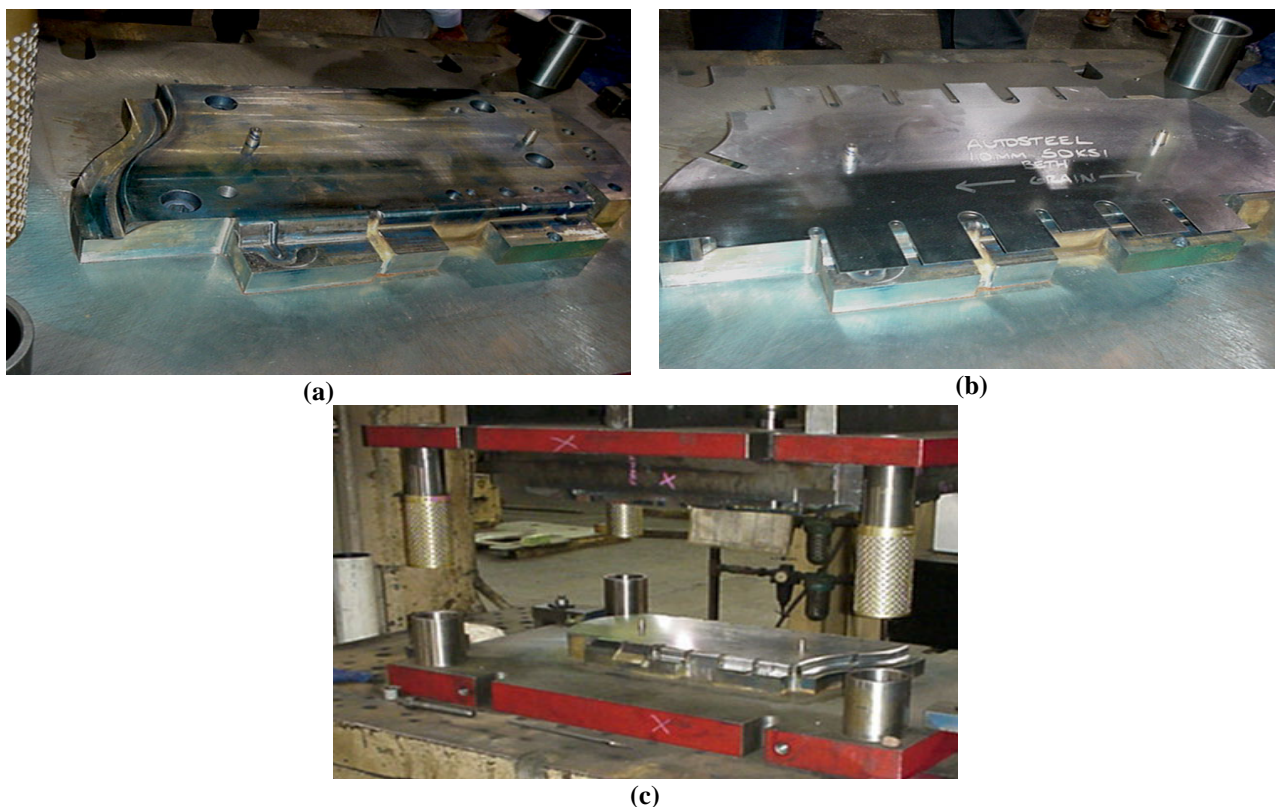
The die used to produce the panel shown in Figure 1. The wrought steel die contained inserts at the flange radii to adjust die clearance. A developed blank was used. (a) Lower die including two locating pins; (b) developed blank on the lower die; (c) complete die in the press after a hit.
